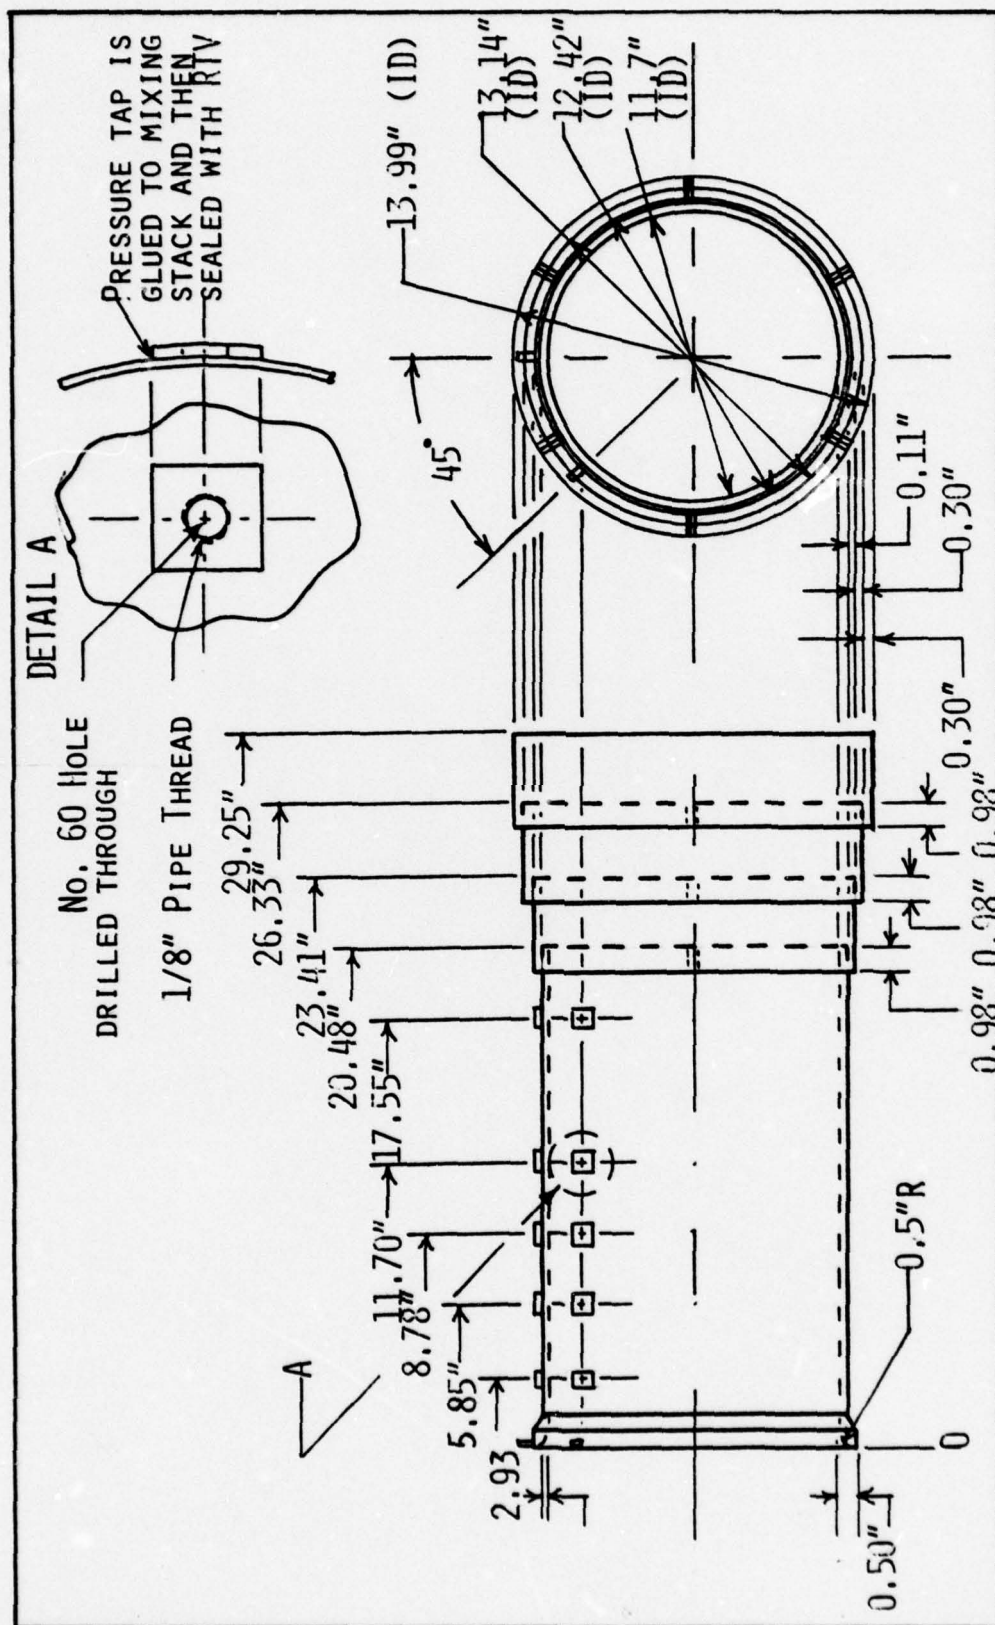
DIMENSIONAL ILLUSTRATION OF MIXING STACK WITH THREE-RING DIFFUSOR
